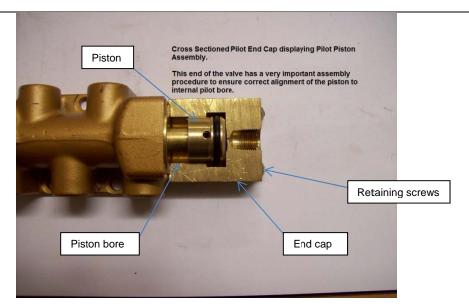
Cross Section Pilot End Cap/Piston Assembly
